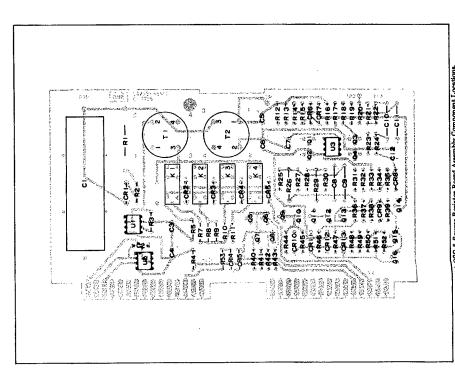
A11 08C & Source Resistor Board Assembly Component Locali
